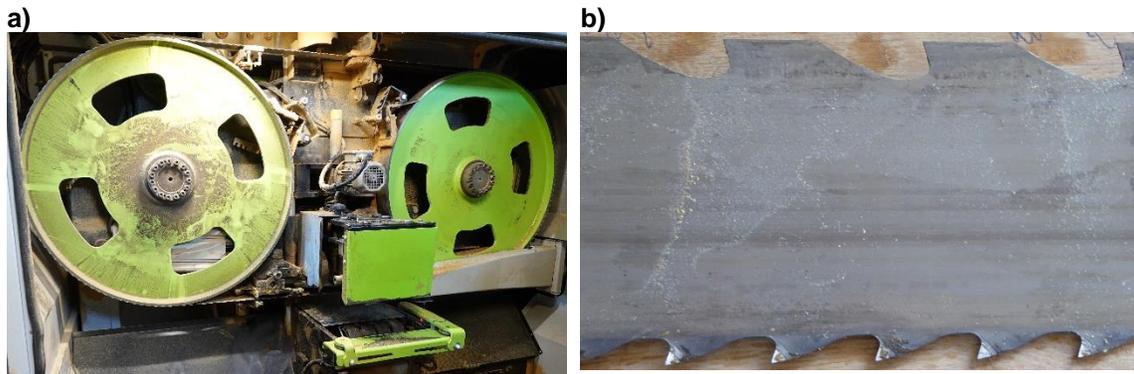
General view of the working section of the band sawing machine DSB Singlehead NG XM (a), and a bandsaw with working (at the bottom) and scraper teeth (on the top) (b)
